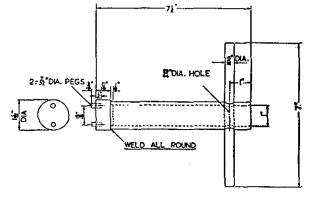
View showing dimensions of special tool used to remove relief valve seat of the control valve shown in Fig. 138.
